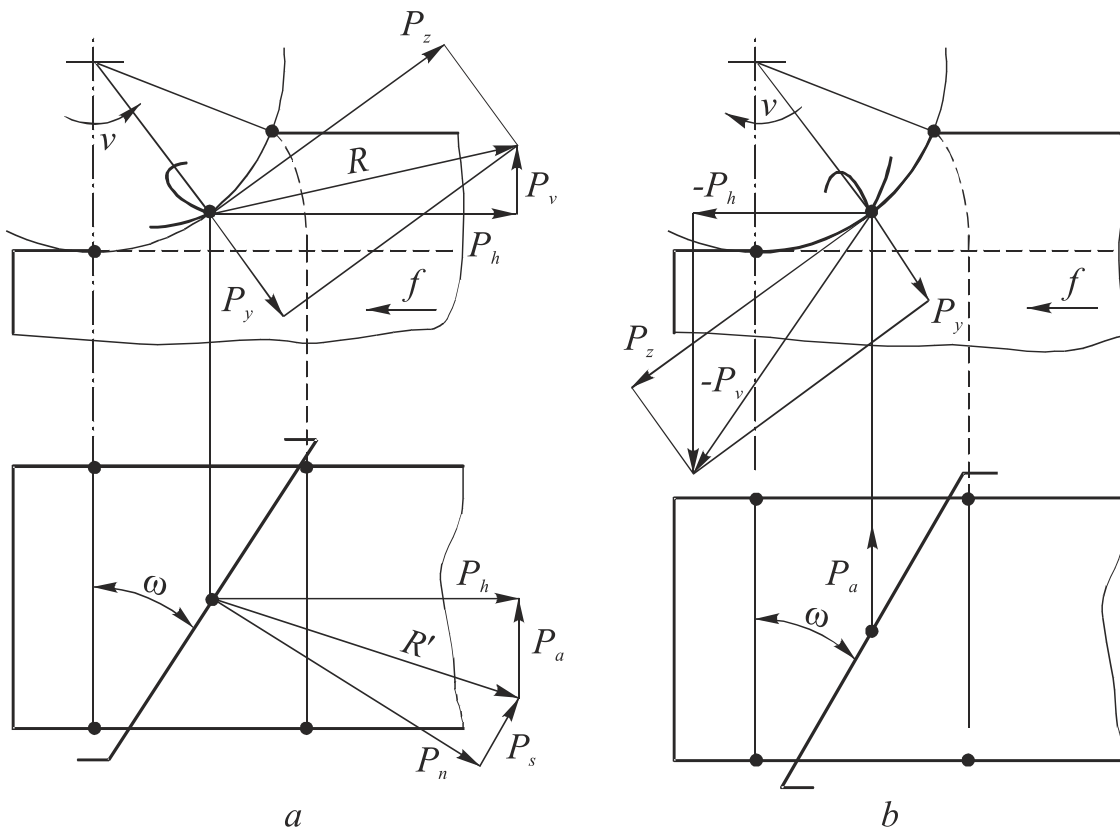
Components of the cutting force  $R$  on a helical tooth of a plain milling cutter: (a) conventional milling; (b) climb milling
